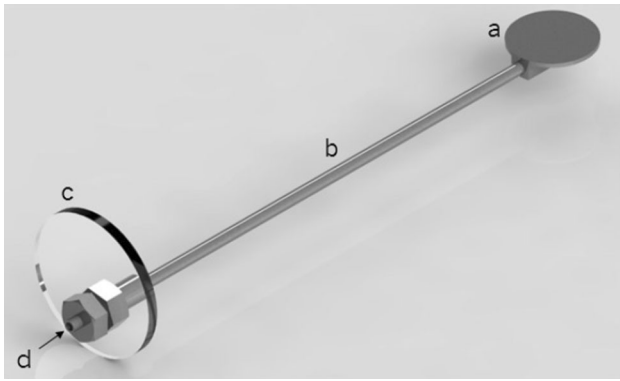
Support platform: *a* base; *b* hollow stainless steel tube; *c* glass window; *d* input to the thermocouple
